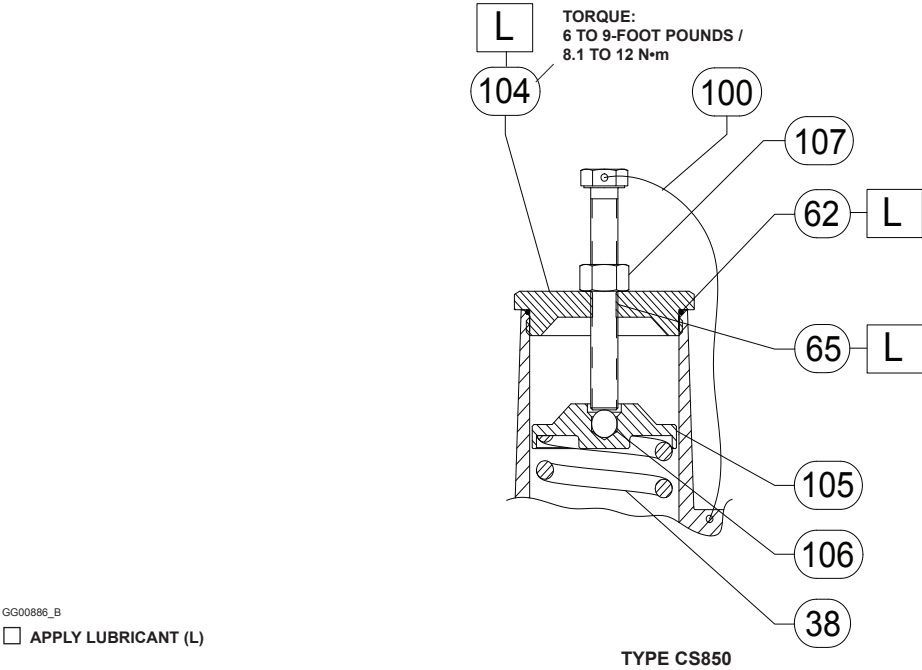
CS800 Series Control Spring Adjustment Assemblies (continued)
